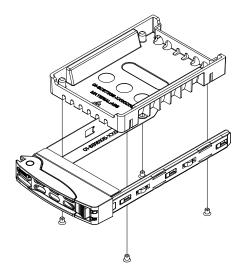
Removing a Dummy Drive from the Drive Carrier
